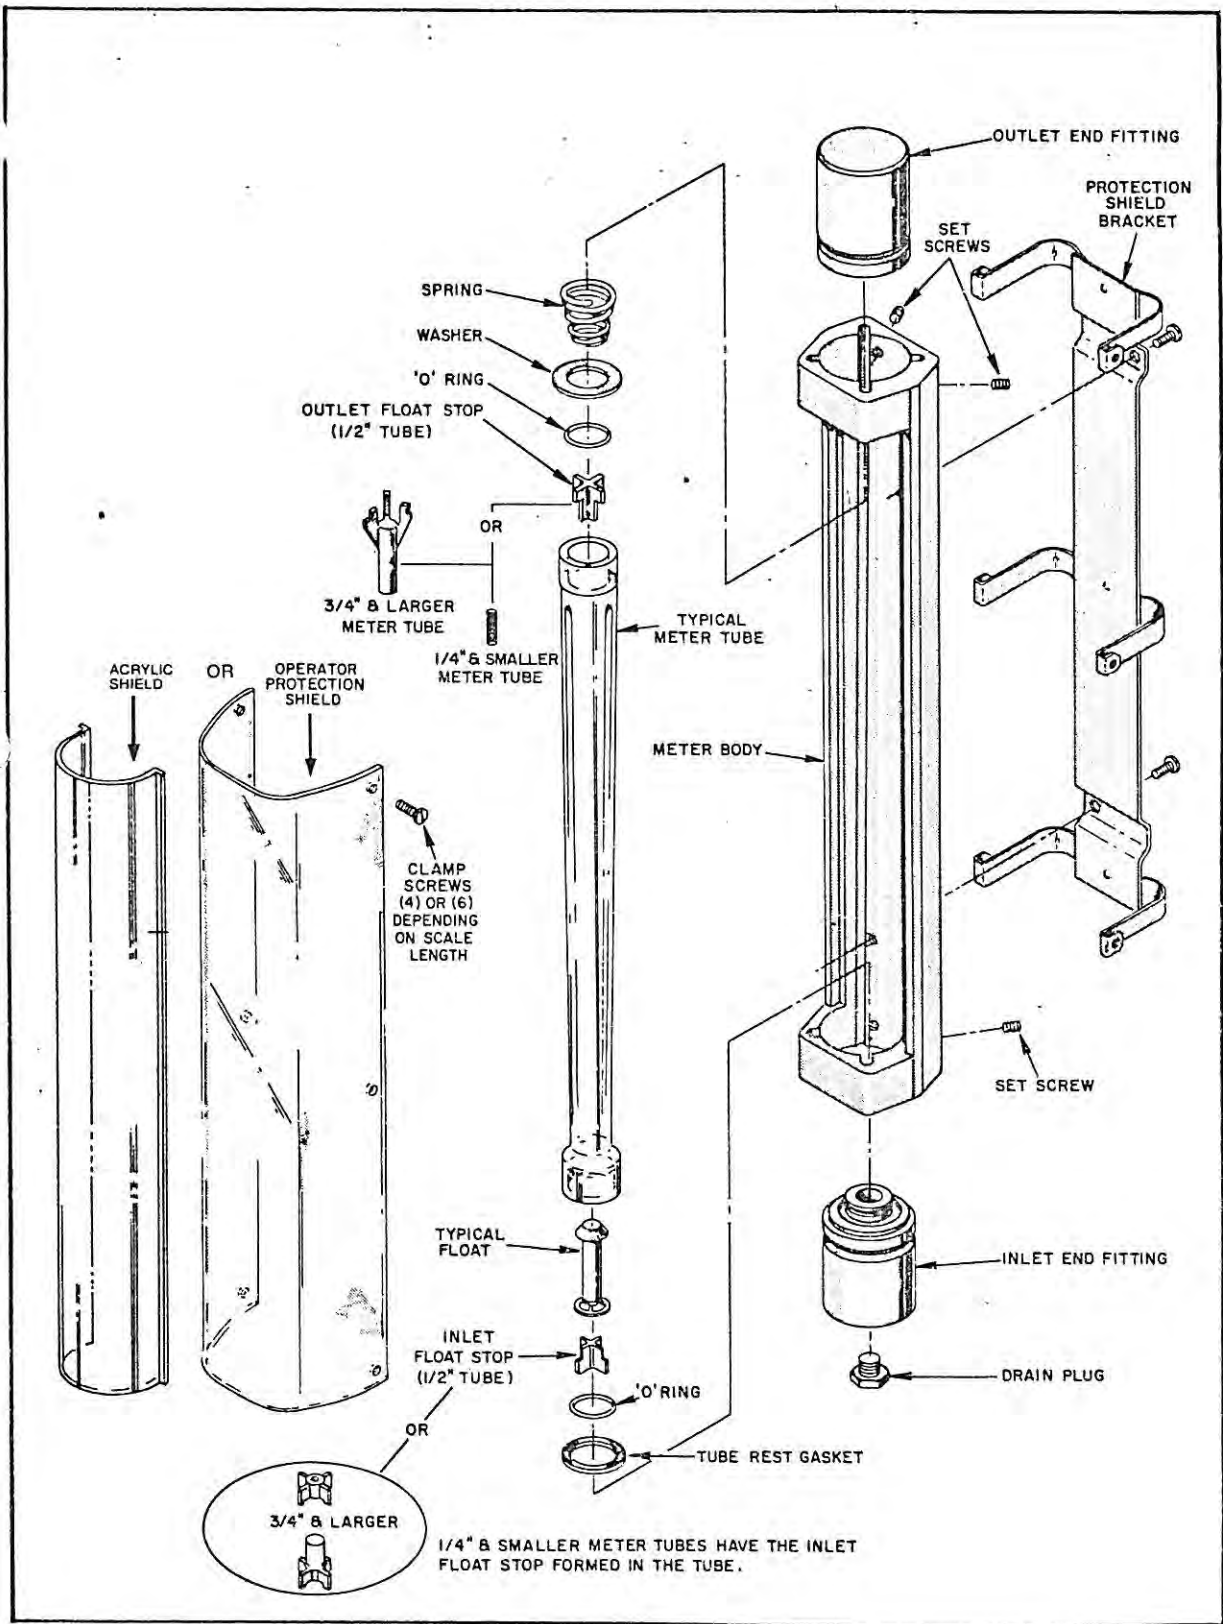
Exploded view of meter (1/2" x 1/2" size illustrated)
